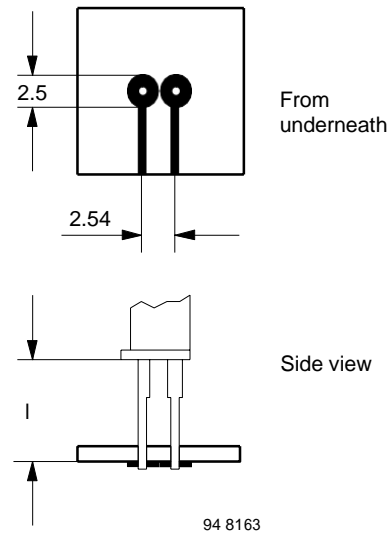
In the case of assembly on PC board, no heatsink (curve c, figure 3)
